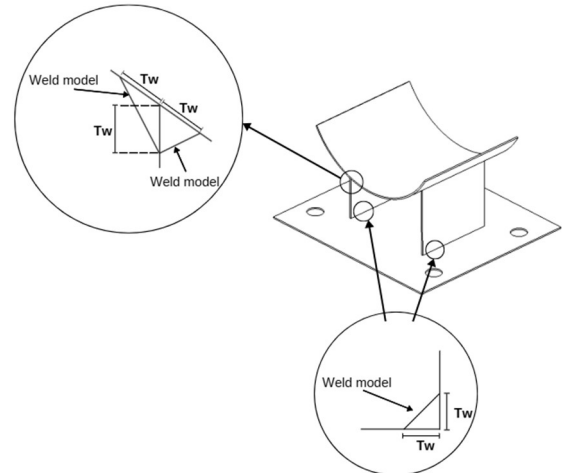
Welding connection modelling on pipe saddle support model
